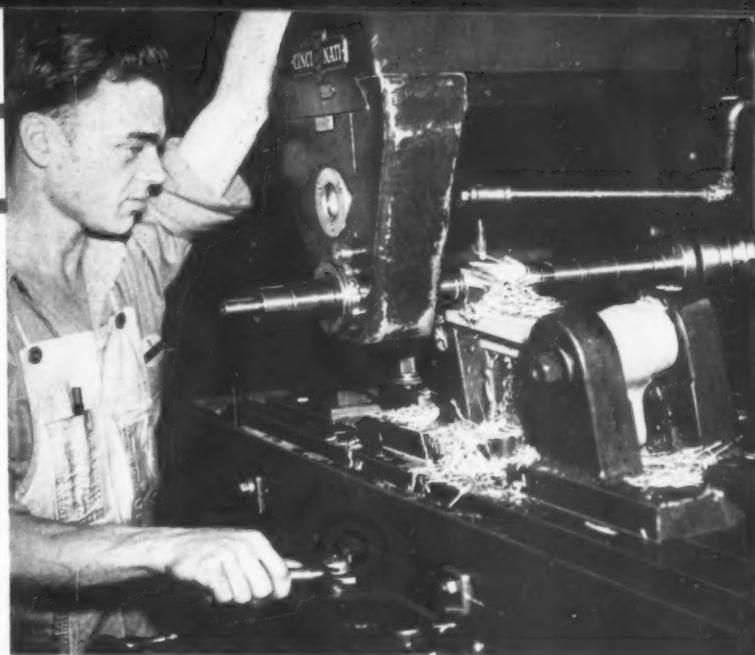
(Above) Production Milling Operation on an Aircraft Forging. Fig. 7. (Below) Milling Die-plate Edges on a Universal Milling Machine
